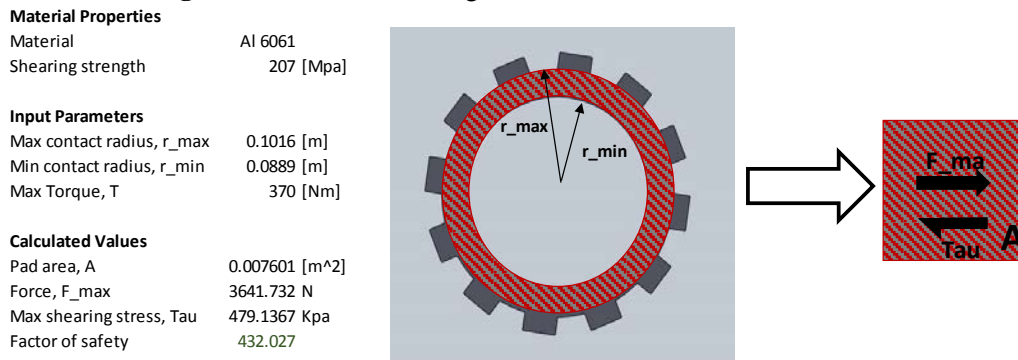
Surface shear calculations for Al 6061-T6 clutch disc.
